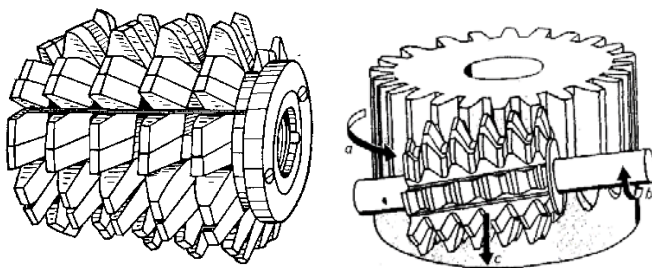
Worm hob cutter: a – design; b – cutting scheme
